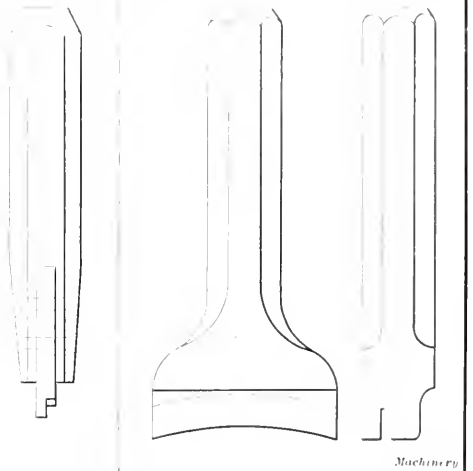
Type of Tool used to insert the Finished Gland Rings
